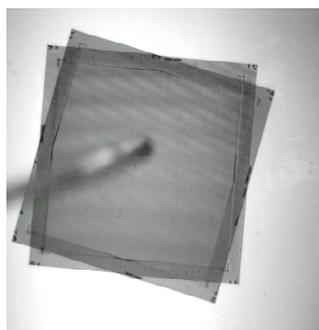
View of the pad and chip. The chip is still held by a suction tube.
